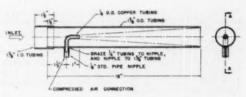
CONSTRUCTION DETAILS OF EJECTOR USED IN FLY-ASH
